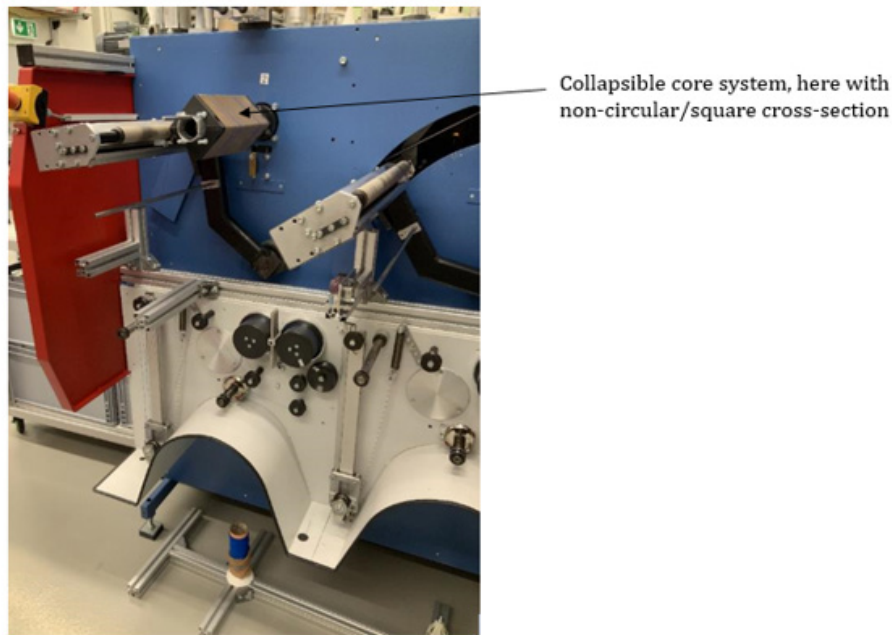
Precision winding machine for the production of structure-winding components, here: for the production of a non-circular component with a square cross-section.
